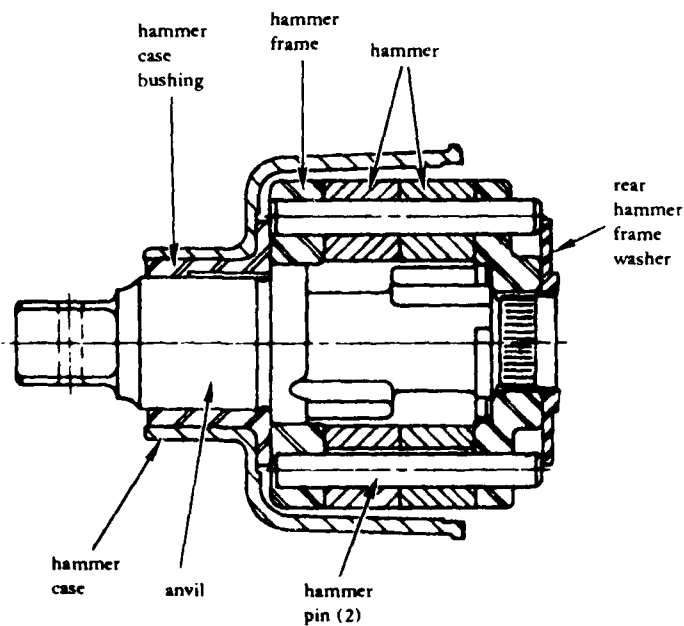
Arrangement of components of Ingersoll-Rand's Model 2910 impact mechanism.
